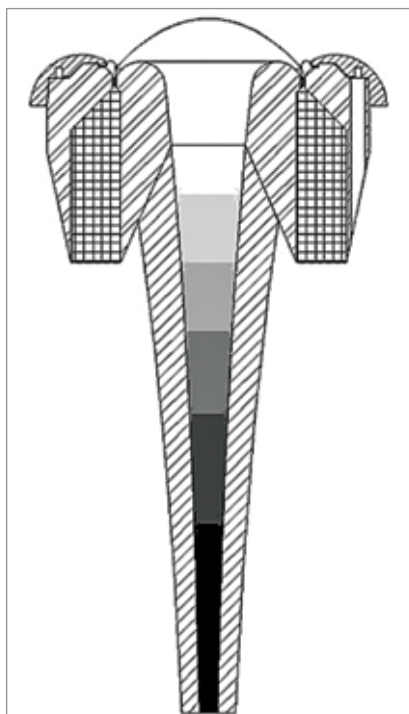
Housing of tapered tube tweeter and mid-range drivers
